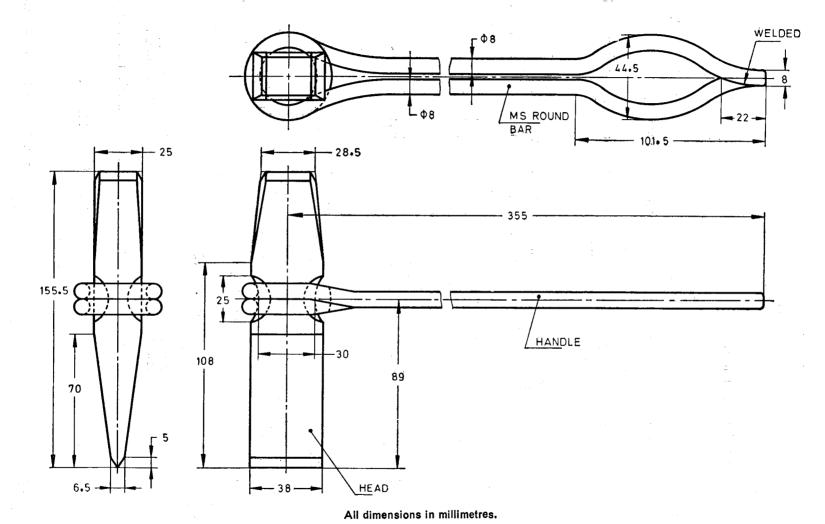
DIMENSIONS FOR FARRIER'S CHISELS WITH HANDLE
